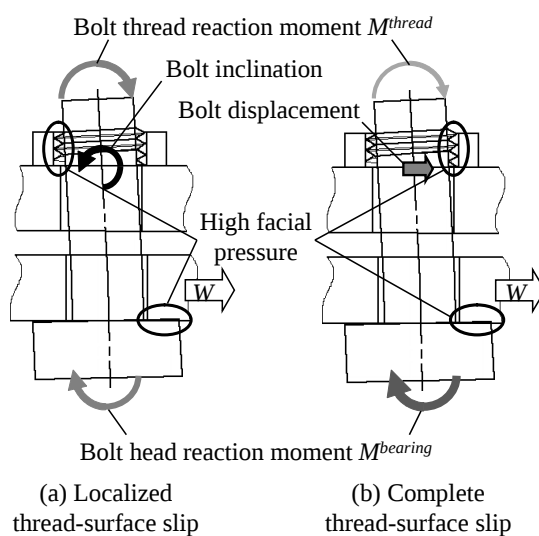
Schematics of moment development on bolt head bearing surface and thread surface due to transverse load.
